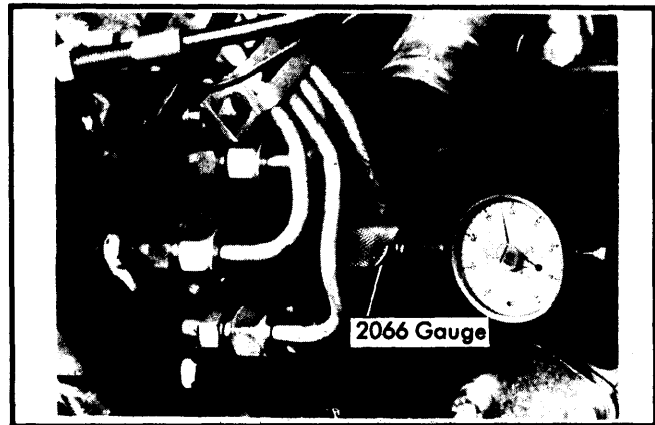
Preloading Injection Pump With Dial Indicator (2066)
